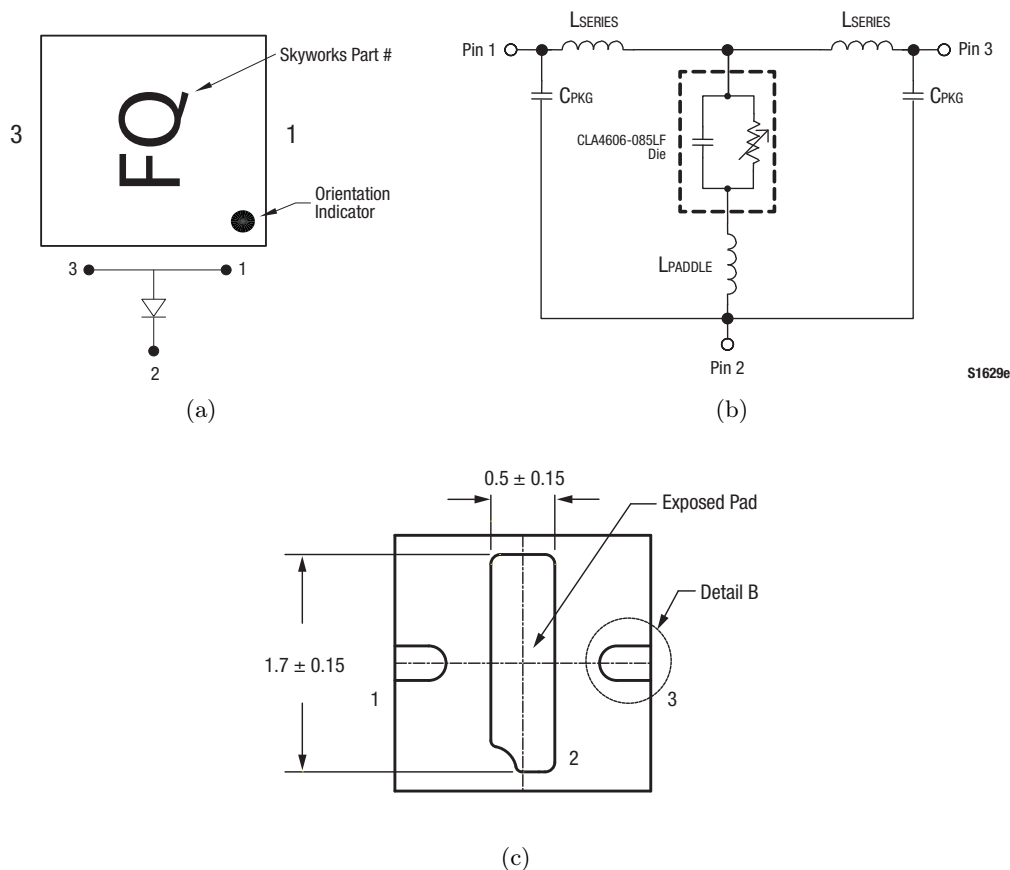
Skyworks CLA46XX-085LF QFN Package Drawings
